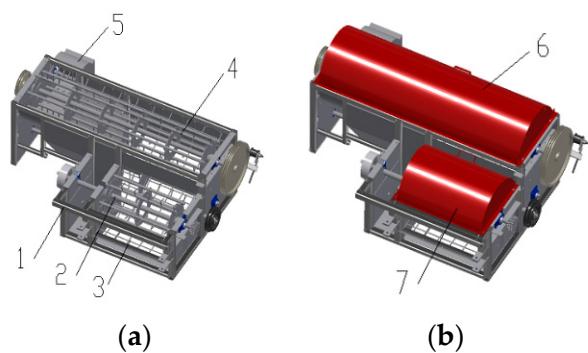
Structure diagram of picking device: 1. Frame; 2. Tangential cylinder; 3. Concave screen; 4. Axial cylinder; 5. Vine discharging assembly; 6. Axial cylinder outer shell; 7. Tangential cylinder outer shell. (a) Without the outer shell. (b) With the outer shell.
